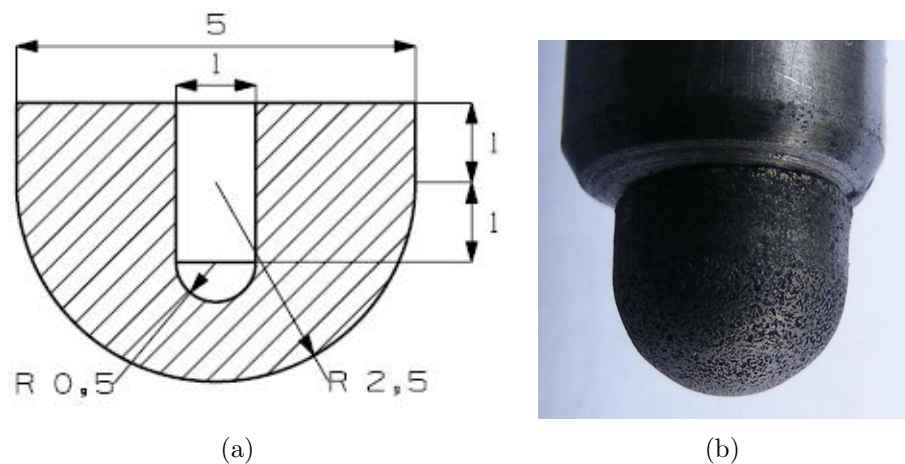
Left: Technical drawing of the porous nozzle which is tested in the EHPC; dimensions in *mm*. Right: picture of porous injector prototype.
